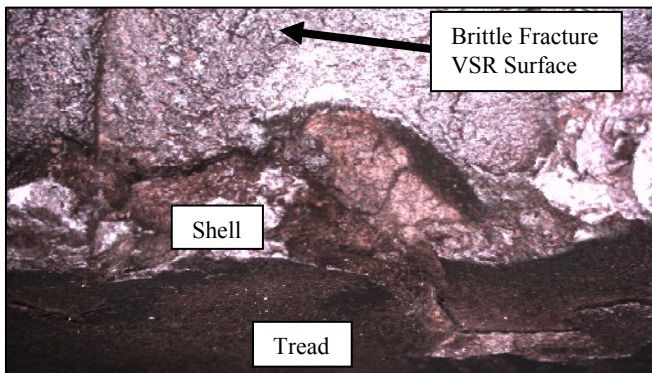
Fracture Surface of Vertical Split Rim
